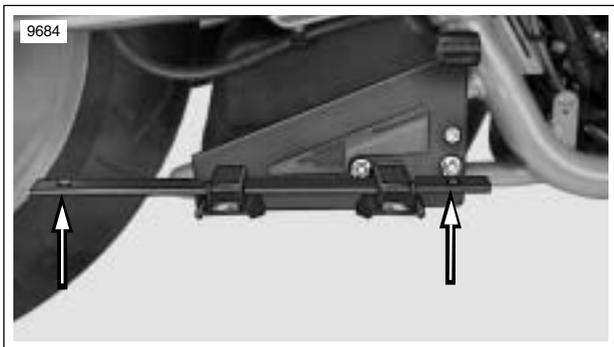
Exhaust Support Fastener Locations (exhaust system removed)
